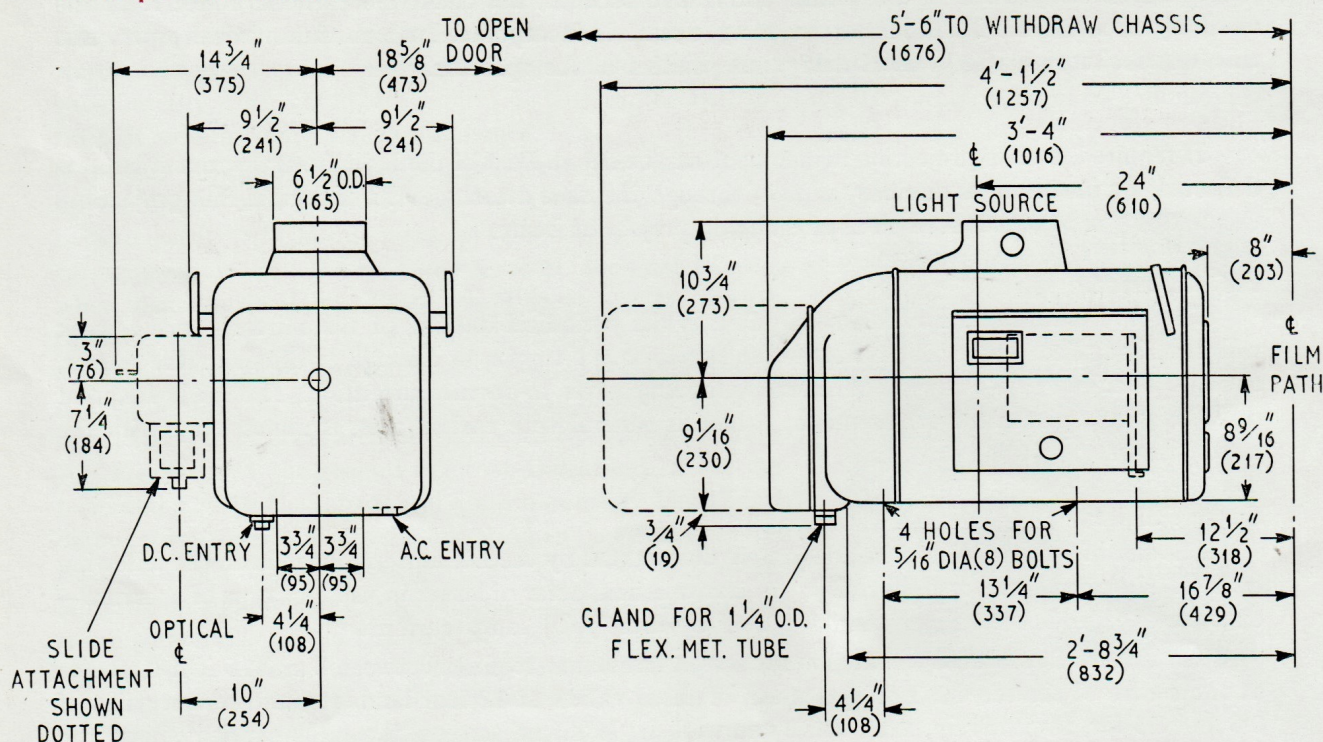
Principal dimensions of the LX Lantern (millimetre equivalents in brackets).
